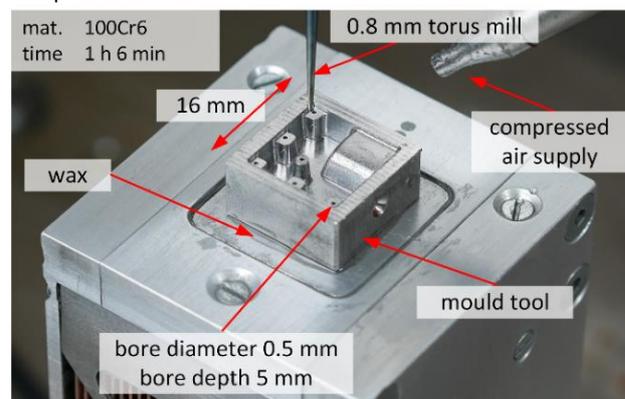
Milling of a mould tool with freeform surfaces on the adhesion clamping system by using wax.
